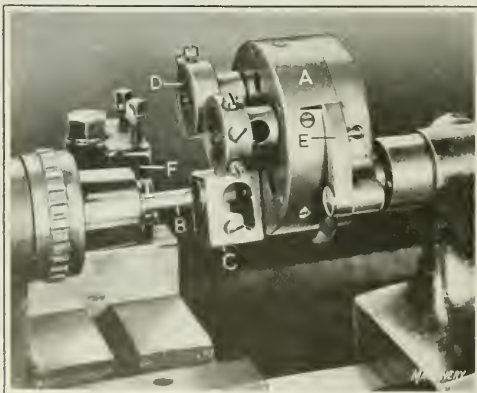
Bench Lathe with Turret Head, used in making Fillister-head Machine Screws
